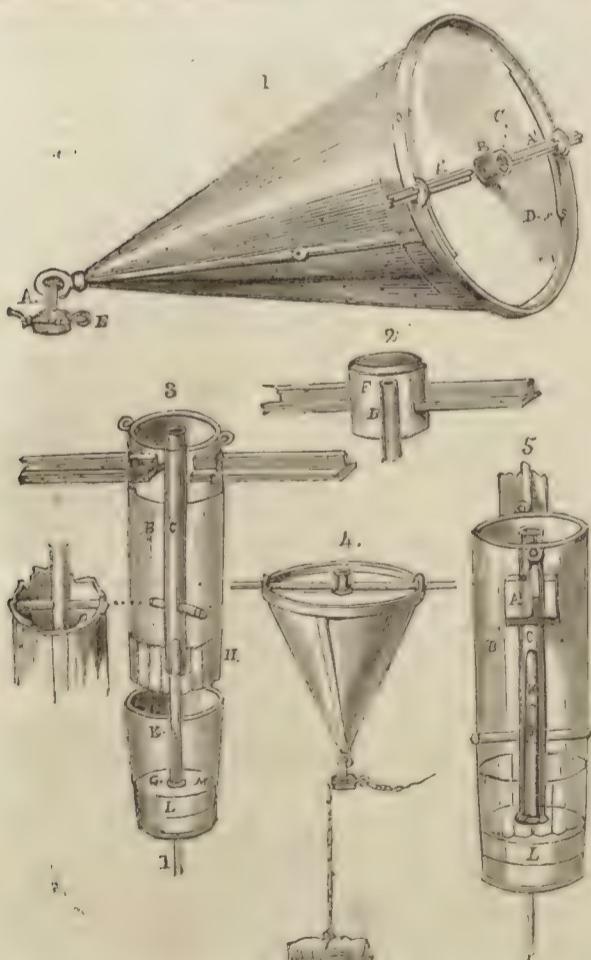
THE INFERNAL MACHINE SIDE AND END.
